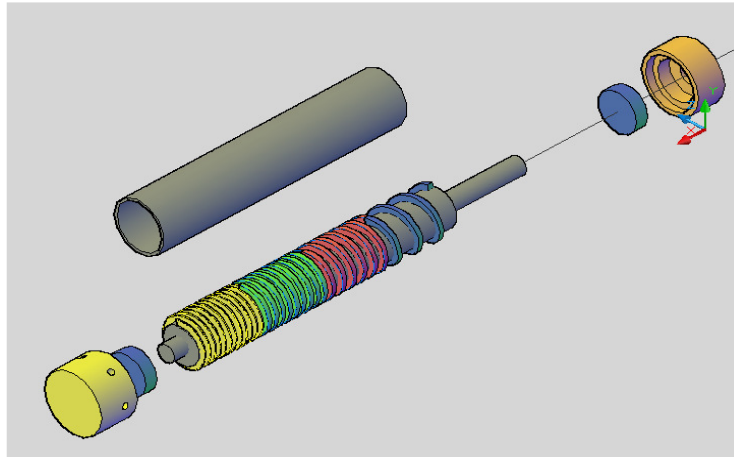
CAD modeling of the cylindrical chamber compression of the prototype of the screw press.
